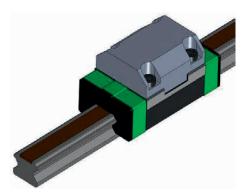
Fitting tool for pressing down on the magnetic scale
